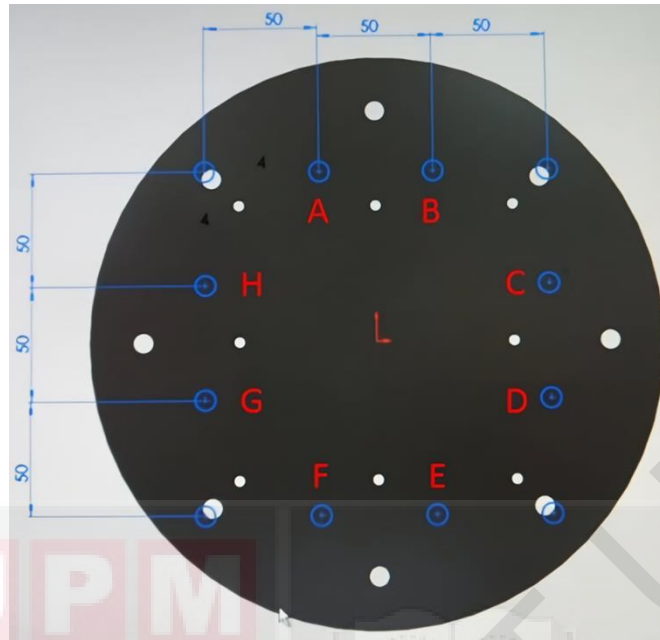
Schematics for new holes drilled into vibration jig (A-H). Unit is in mm
